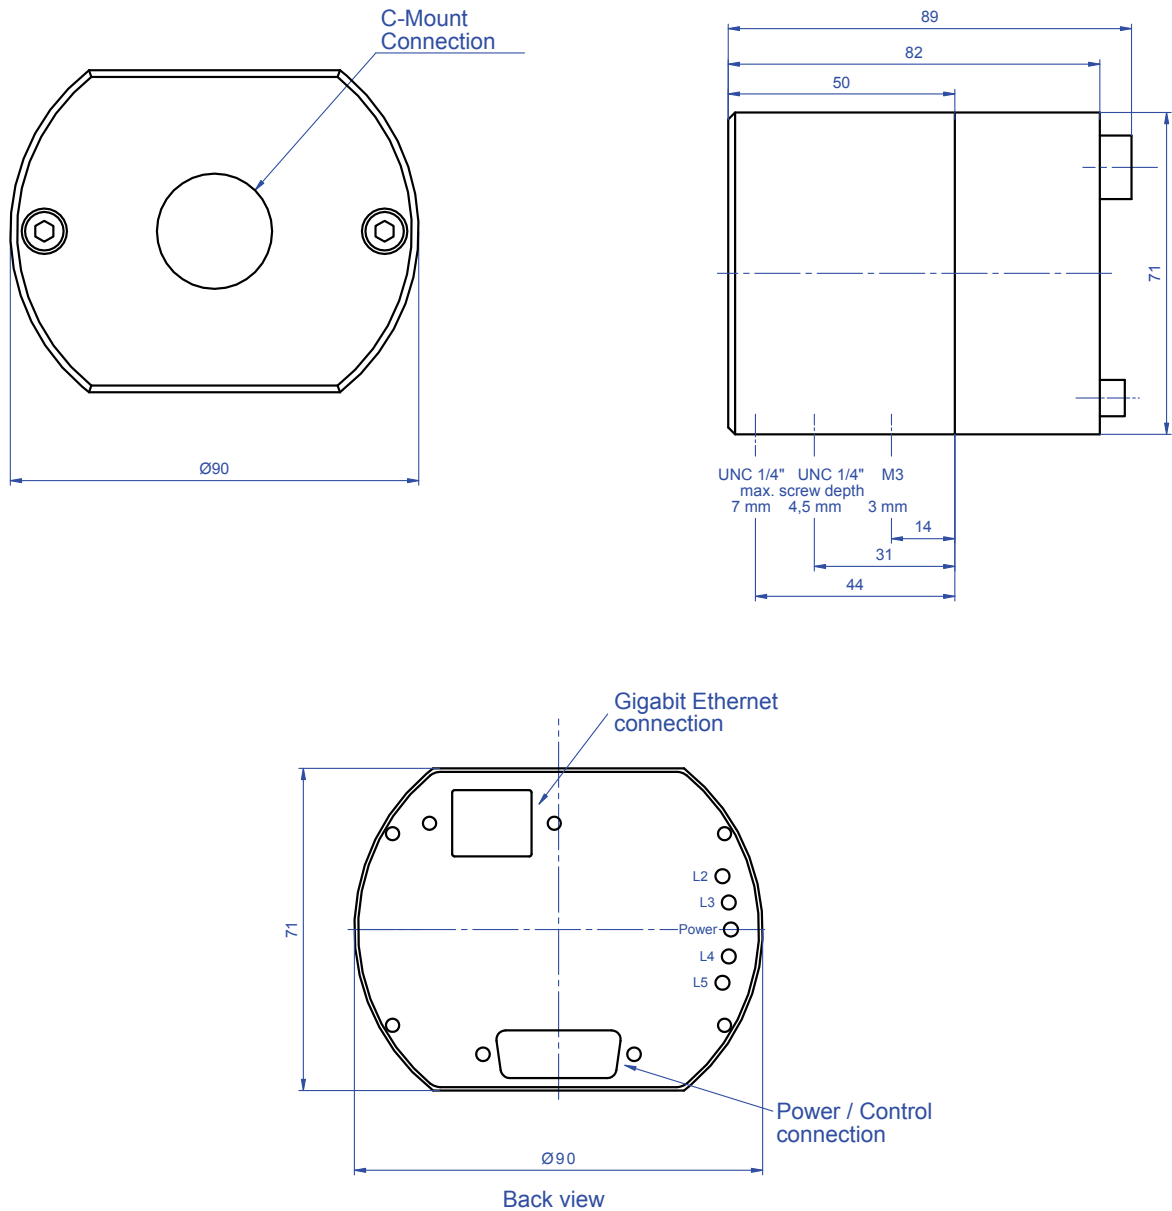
Camera dimensions: Bigeye P-132B (front/side/back)
